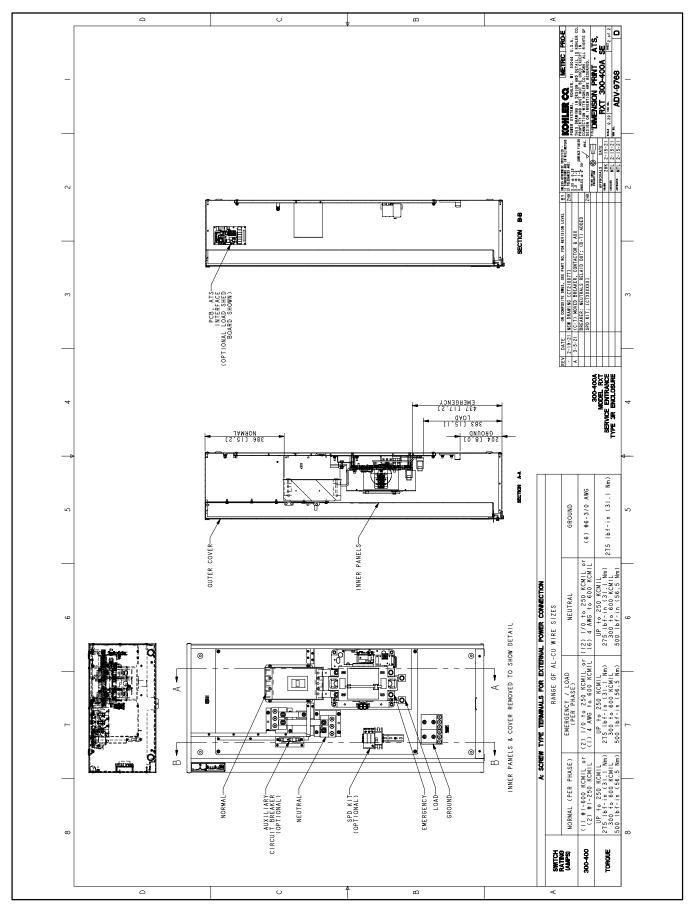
Enclosure Dimensions, 300-400 Amp, Service Entrance, ADV-9768, Sheet 2
